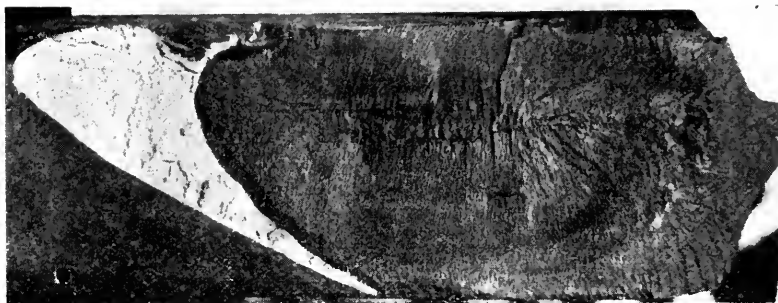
SHOWING HORIZONTAL FISSURE, LOOKING DOWN ON TOP OF HEAD.
